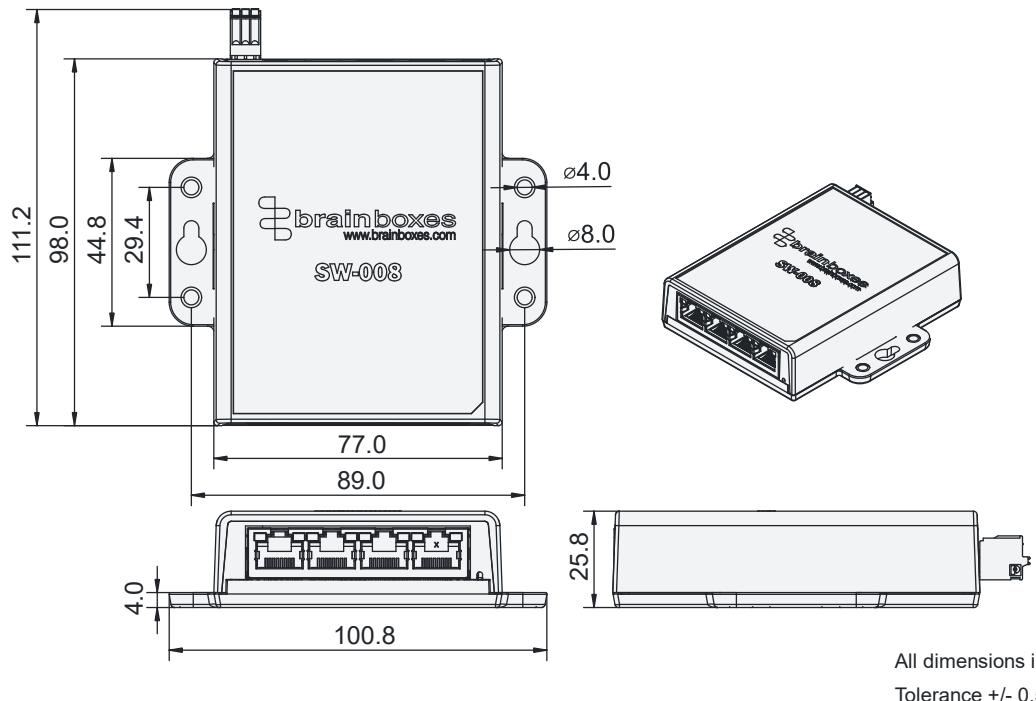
SW-008 2D DIMENSIONED DRAWING
